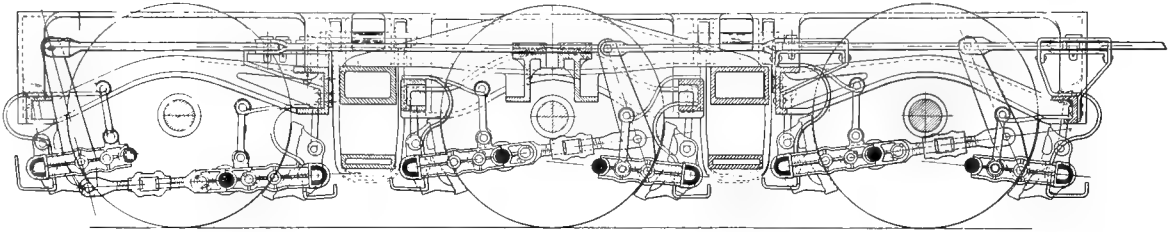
Creco Brake Beam Clasp Brake Arrangement for Triple Trucks. Chicago Railway Equipment Company.
